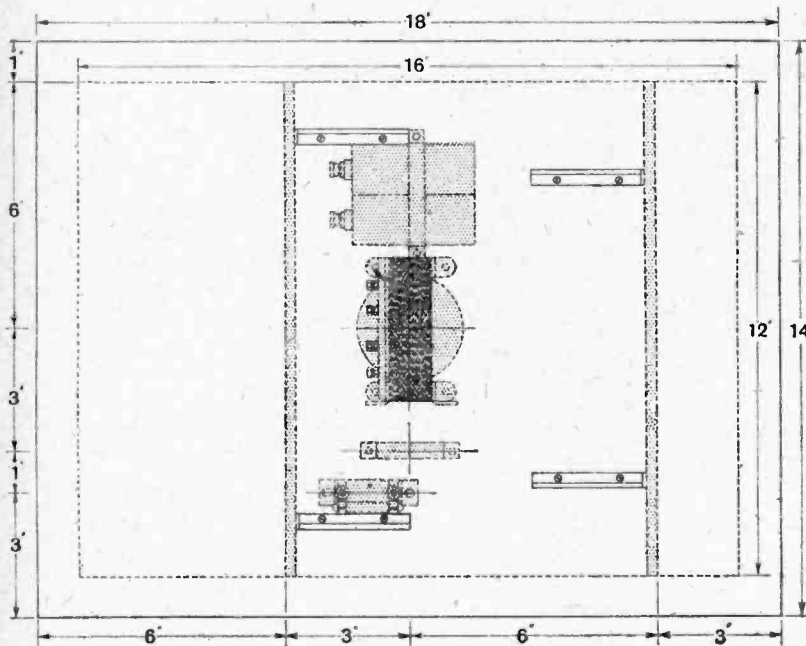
Baseboard dimensions and positions of the transformer grid batteries and grid condenser and leak.
